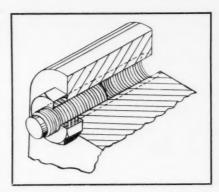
Drawing showing use of dog point screw with hex jam nut as jig support.
